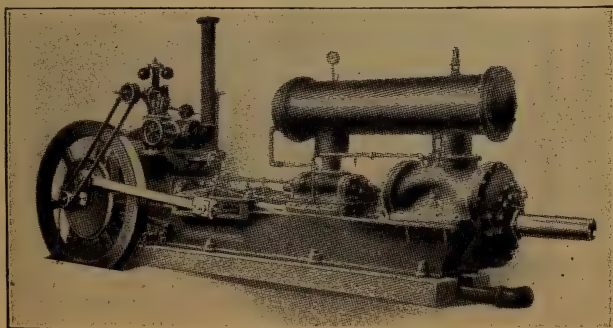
Ingersoll-Rand Straight Line Steam Driven Two-Stage Air Compressor.
